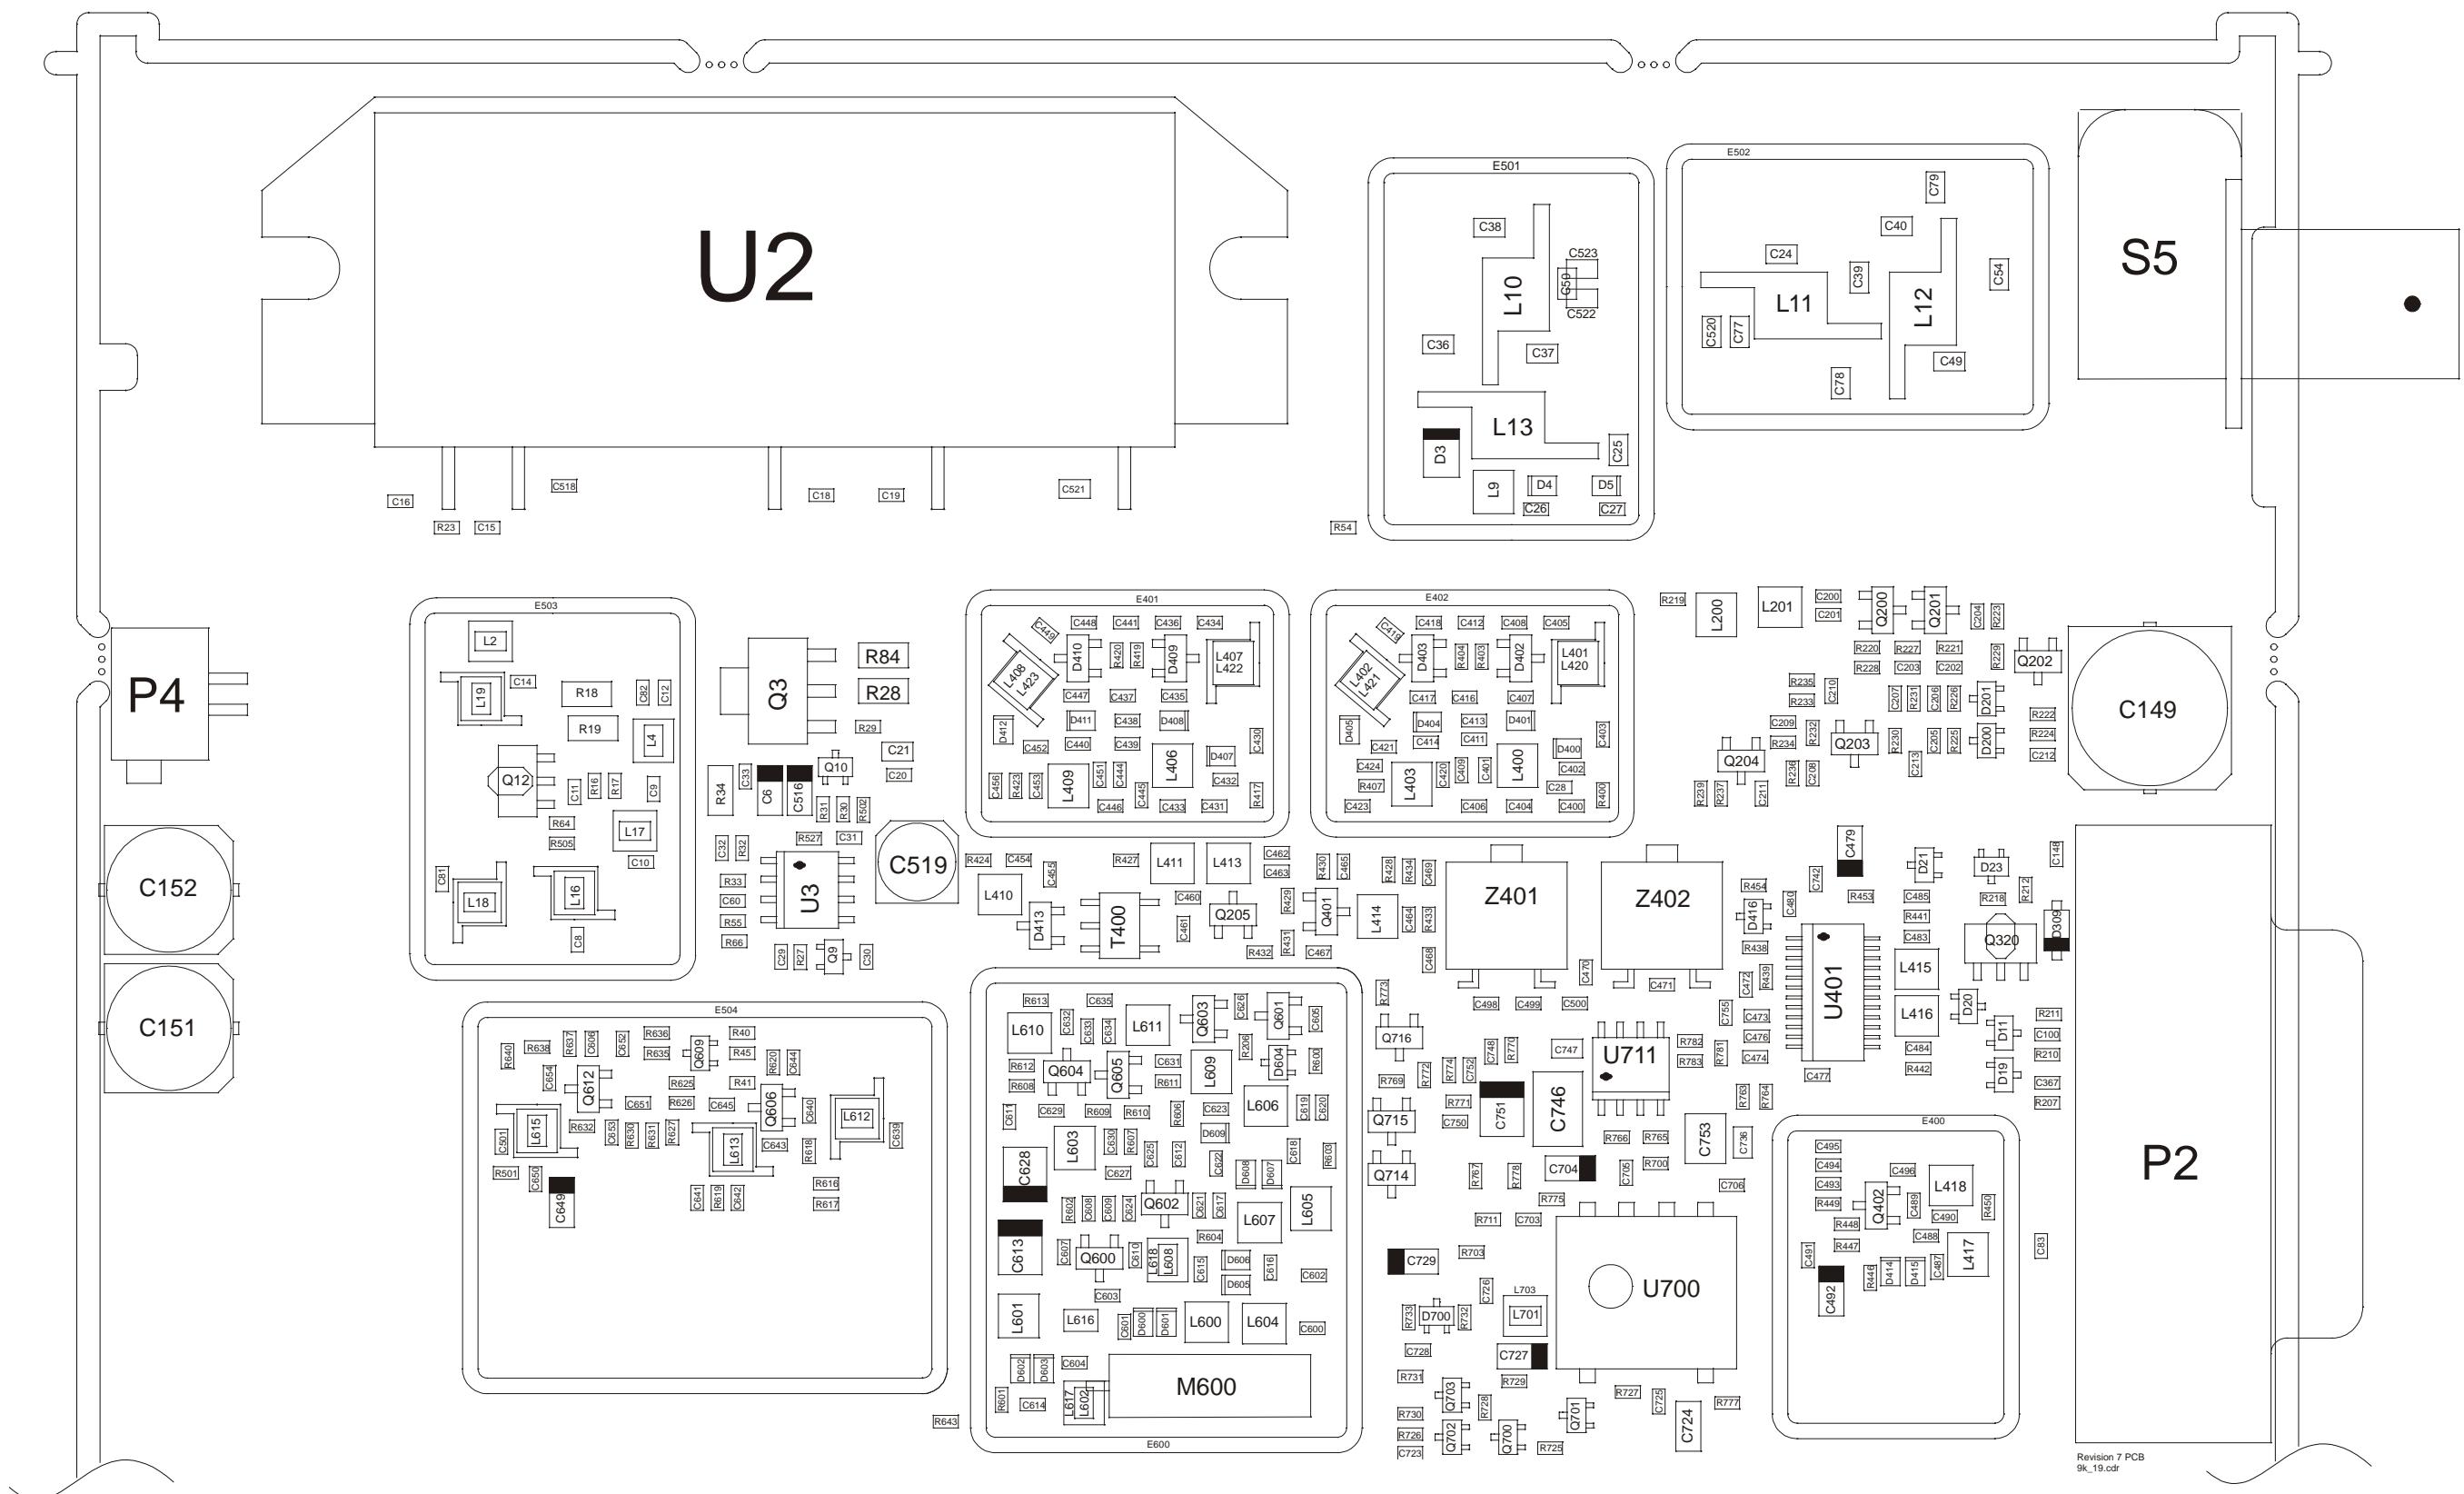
SRM9000 PCB Layout, Top (1/2)
